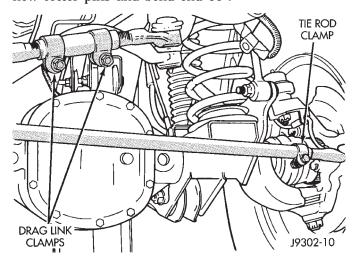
Tie Rod/Drag Link Clamp Bolt
